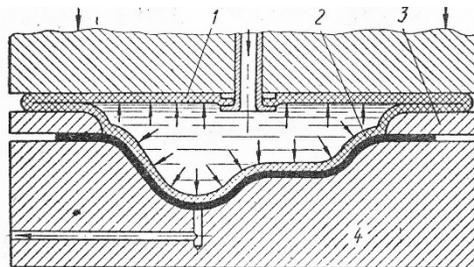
Hydraulic towing toll 1 – sealing rubber cushion, 2 – molded part, 3 – holder, 4 – rod
